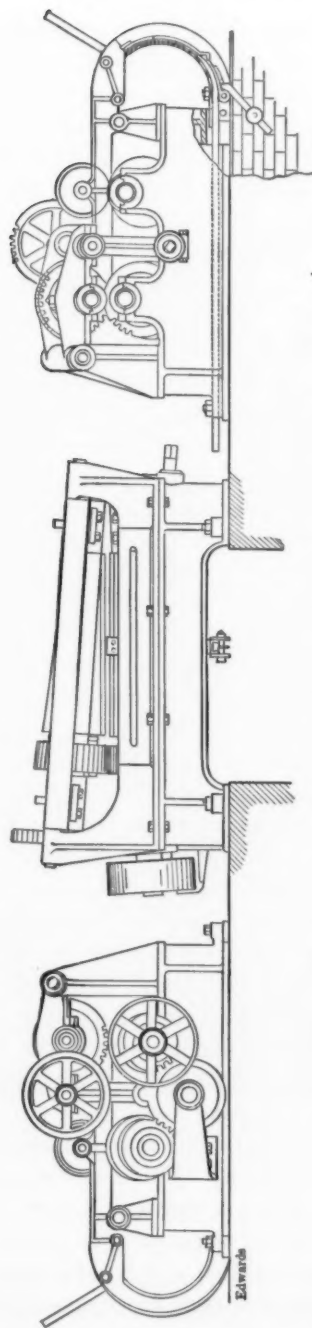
CONICAL ROTARY SHEAR USED FOR CUTTING HOT COTTON-TIE DIRECT FROM THE FINISHING PASS. THE RIGHT-HAND EL-
